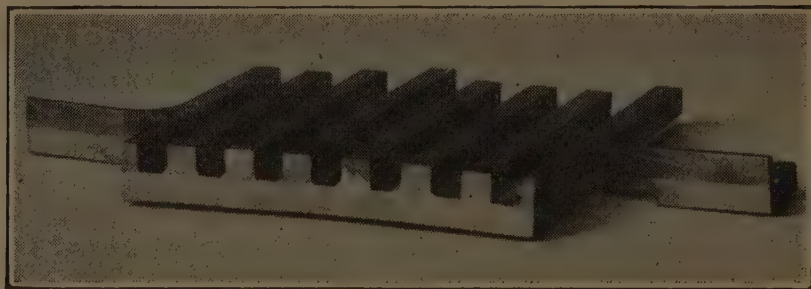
FIG. I.—A squirrel-cage construction used on large rotors. The bars are brazed by the heat of an electric current to the outer surface of a plain end ring (see Fig. B(h)).
